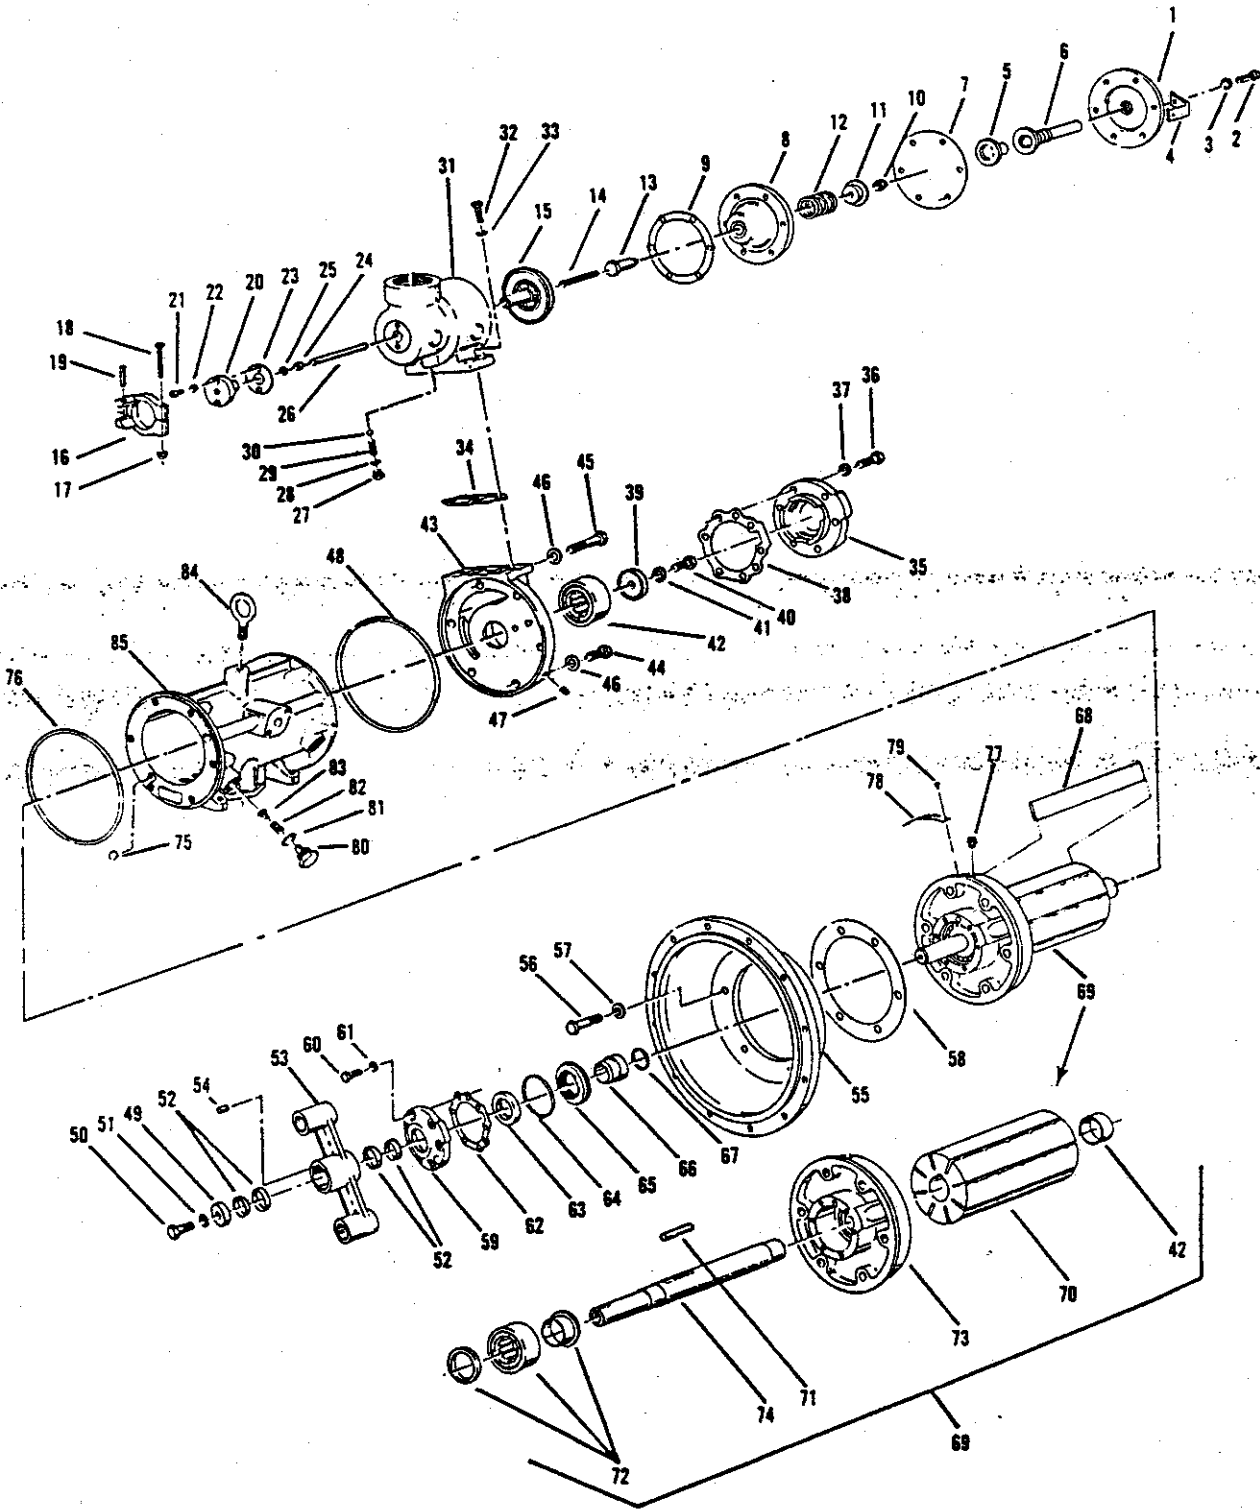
AIR COMPRESSOR ASSEMBLY
